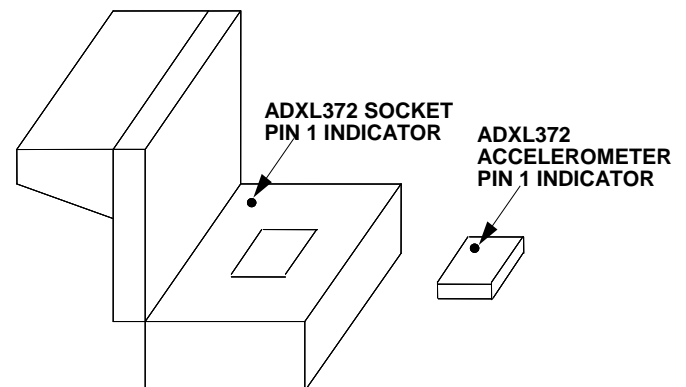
Location of Pin 1 Indicators for the ADXL372 Accelerometer and Socket
